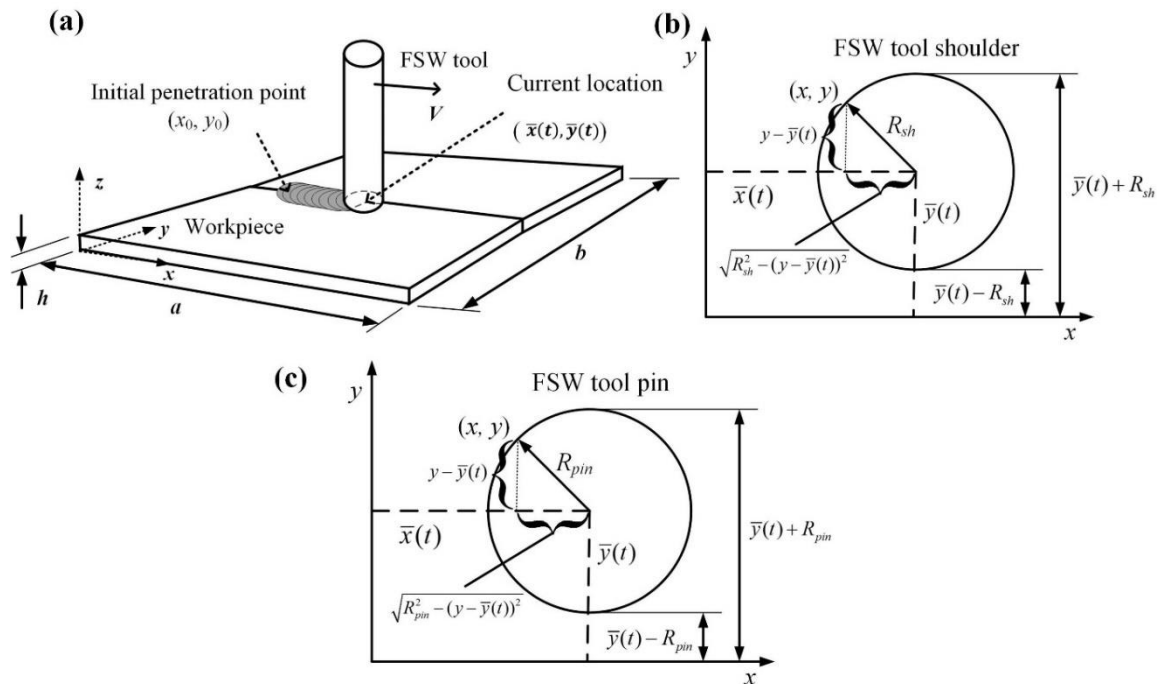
Coordinate system used by Salimi et al. (2016) for describing 3D heat flux during FSW: (a) initial position and current position of tool, workpiece dimensions (b) FSW tool shoulder (c) FSW tool pin
